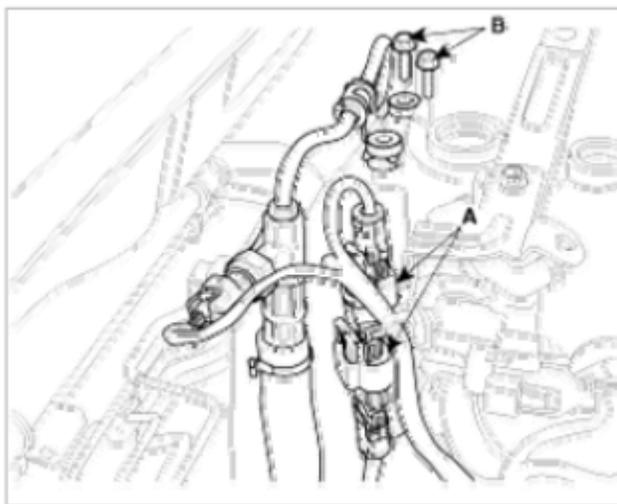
Locating RH Oxygen Sensor Connector And Power Steering Hose Mounting Bolts
